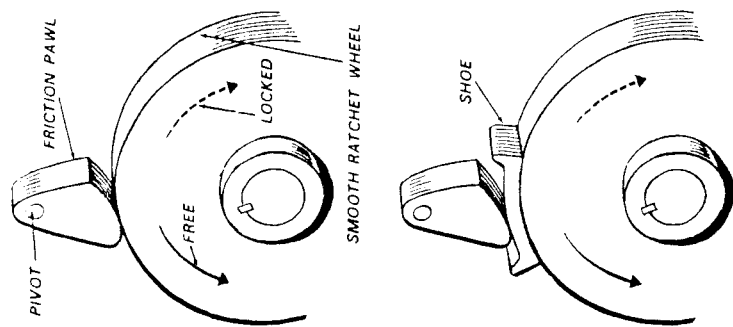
Quiet ratchet works by friction. Pawl may be fitted with a shoe as in bottom drawing.
